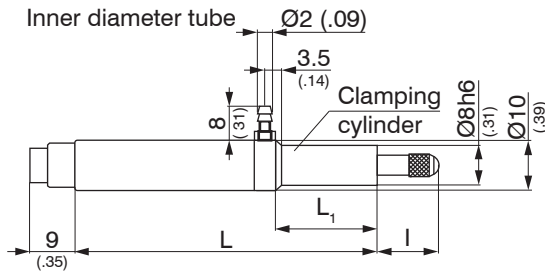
Sensor, Option V "Pneumatic push" with axial connection
